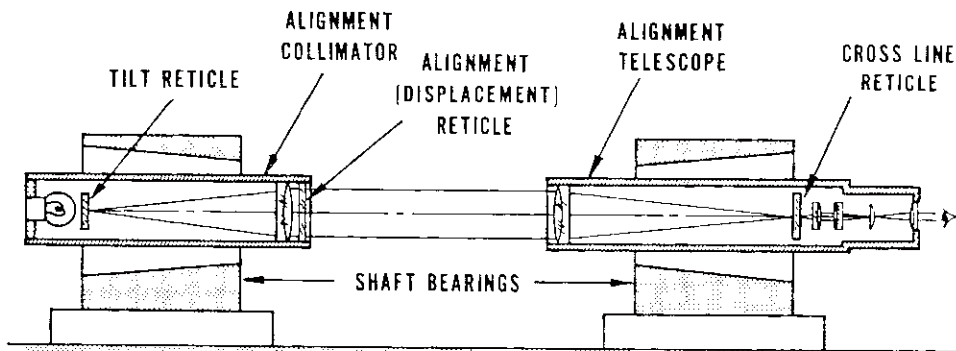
Aligning ship's shaft bearings with telescope and target collimator
